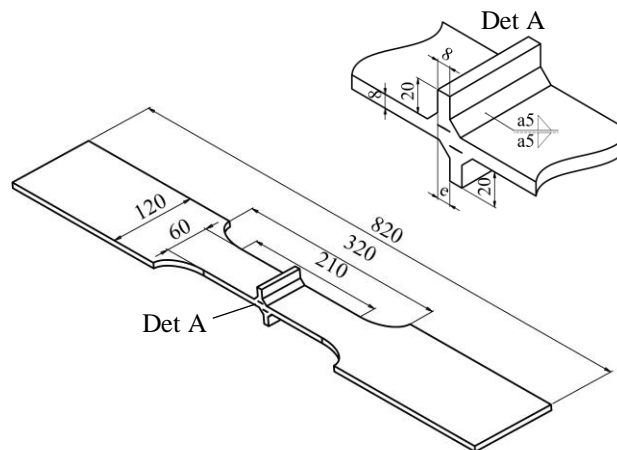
Shape and dimensions of the test specimens (all dimensions in mm).
